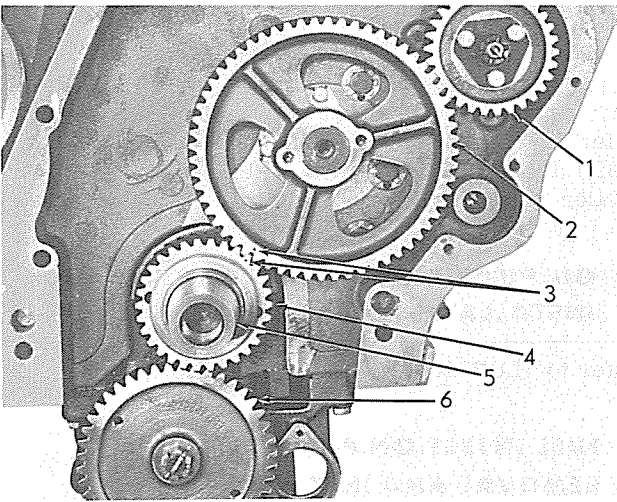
Typical Gear Train (Engines with American Bosch Fuel Injection Pump but without Fan Drive Pulley) (T-19297)
